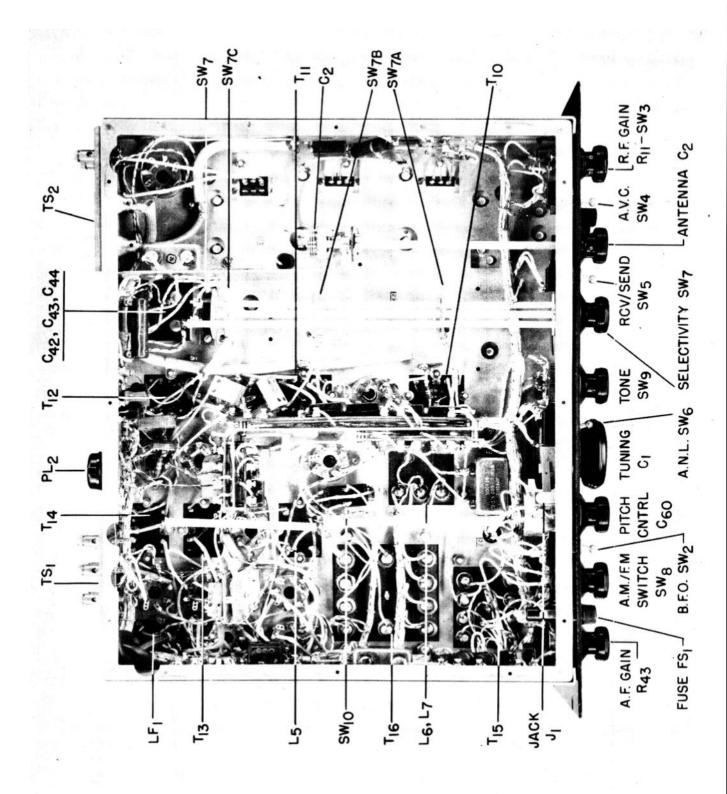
Radio Receiver CHL-46130-D, Bottom View Of Chassis
